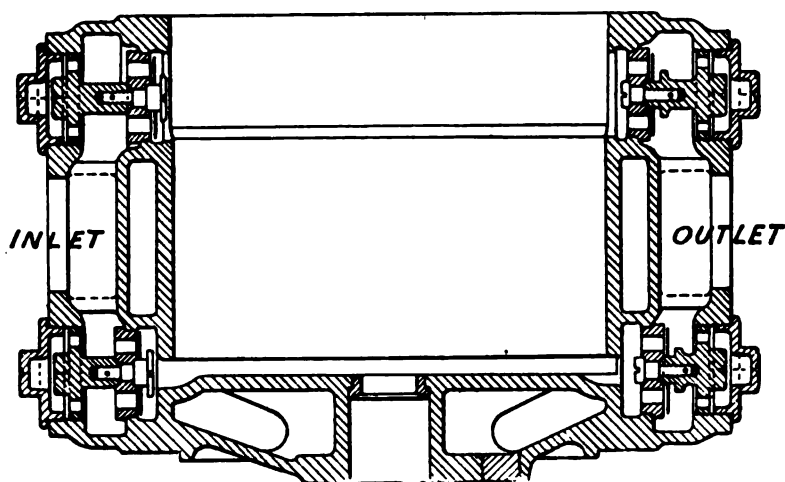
Enlarged Transverse Section through Air Cylinder of Brotherhood Compressor, to show Valves.
